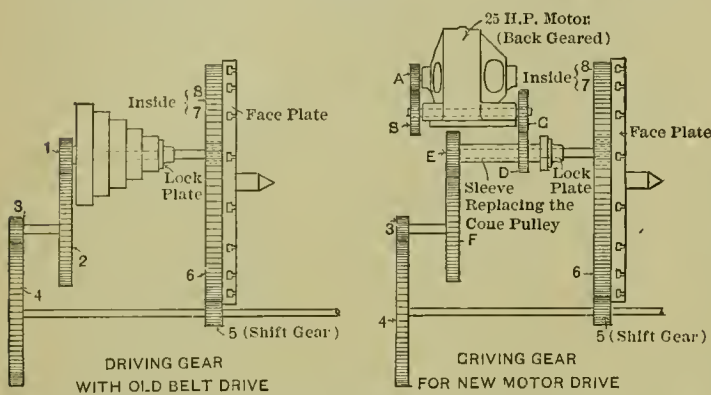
DIAGRAMS OF THE OLD AND NEW ARRANGEMENTS OF THE GEARING IN THE DRIVE OF THE NILES DRIVING WHEEL LATHE, SHOWING CHANGES NECESSARY FOR THE MOTOR DRIVE.
